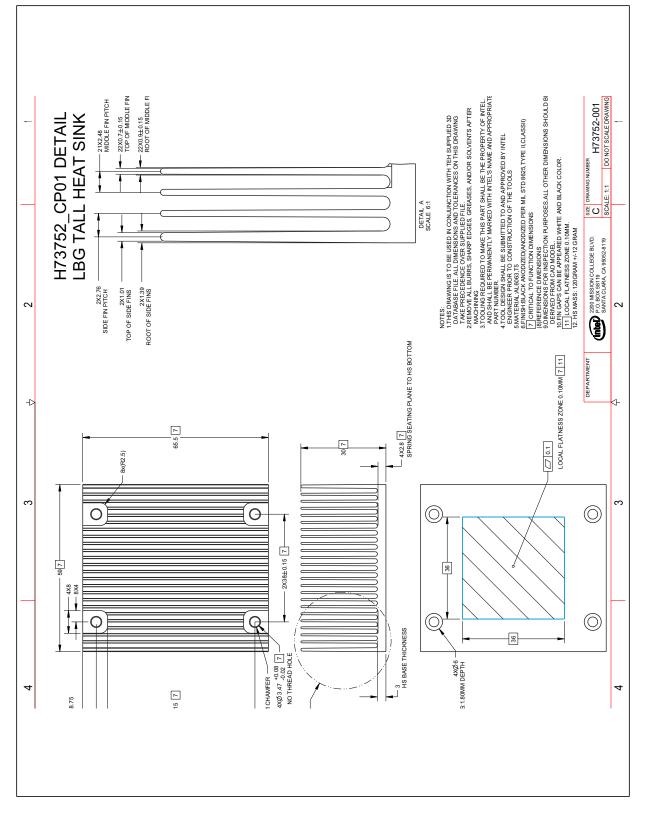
H73752 - Reference Heatsink Assembly Drawing - Sheet 1 of 2
